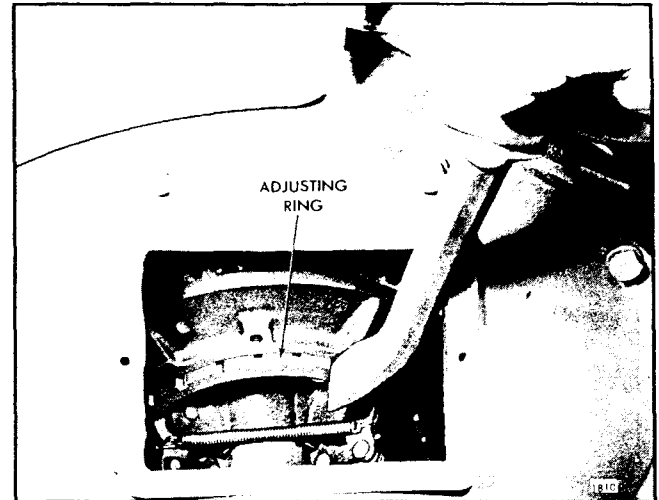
Adjusting 8, 10 or 11-1/2 Inch Diameter Power Take-Off Clutch
